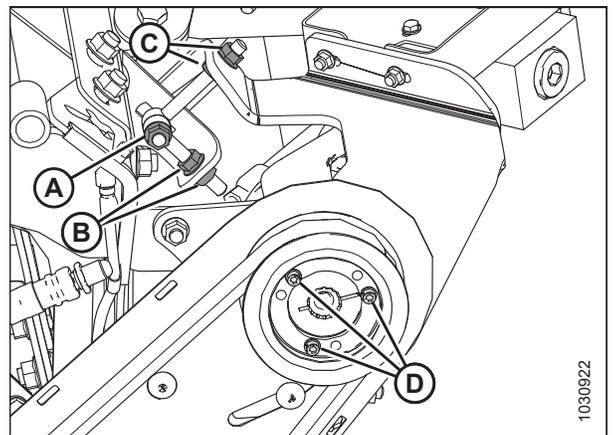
Drive Pulley – Conditioner Drive Motor
